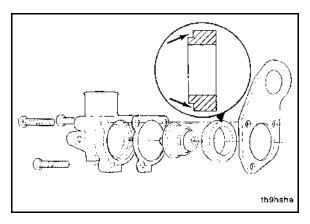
REMOVE THREE CAPSCREWS, THE THERMOSTAT HOUSING, LIFTING BRACKET, THERMOSTAT, AND THERMOSTAT SEAL
